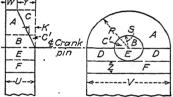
Enlarged detailed arrangement of the outer end of the crank arms in Fig. 7-20.
